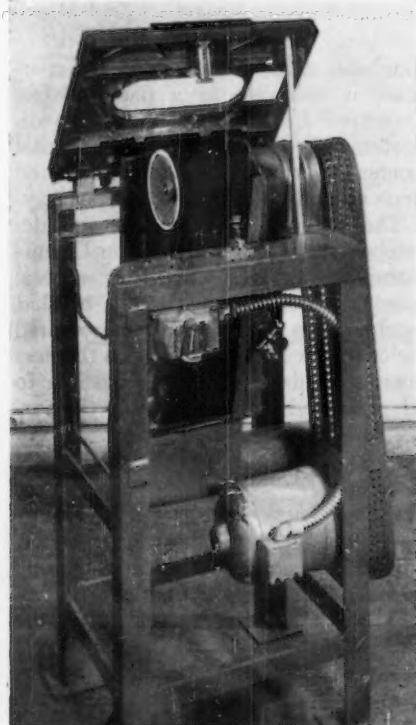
Sander with Top Raised and Dust Cover Removed to Show Sander Belt, and Pulley Arrangement.
